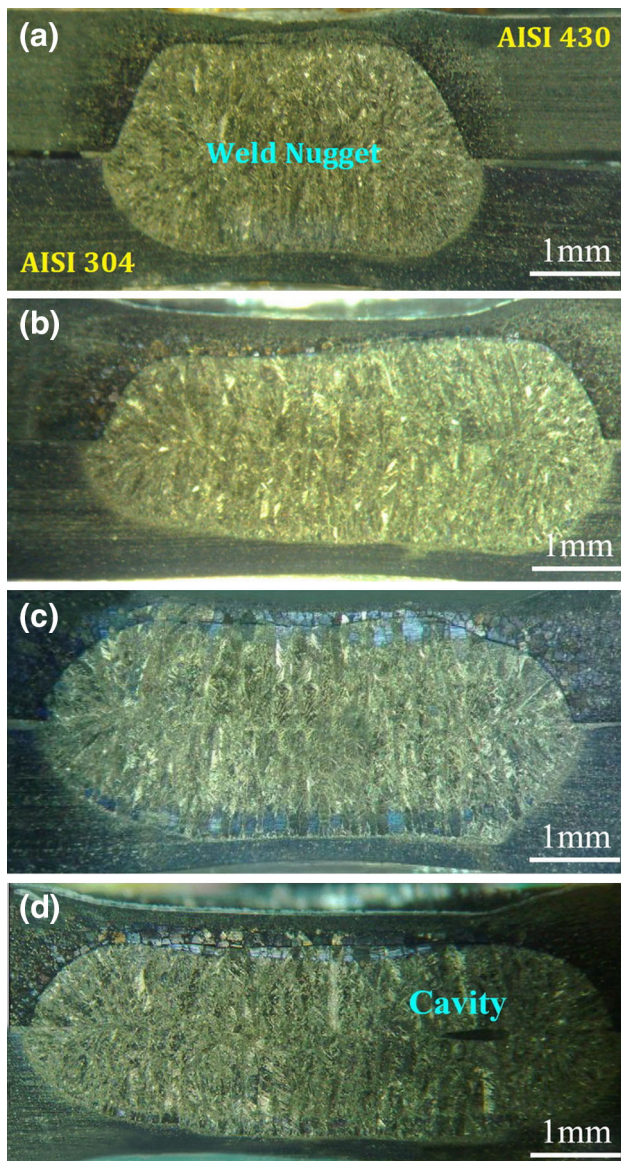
Macrostructure of dissimilar resistance spot welded between austenitic and ferritic stainless steels for various welding times: a 0.4, b 0.8, c 1.2, and d 1.6 s
